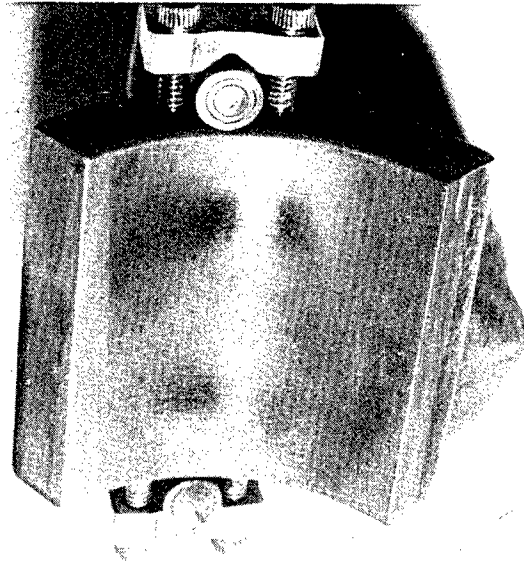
Contact Surface on Tilting Pad Bearing After First Series of High Speed Rubs
